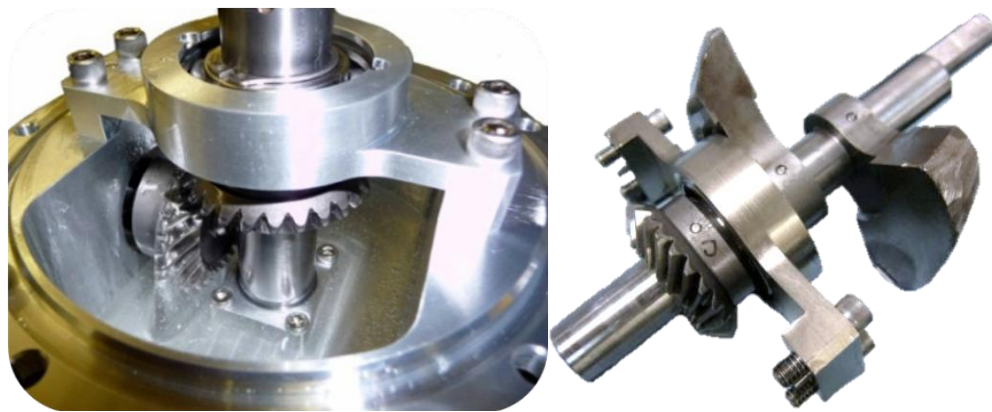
Expander lubrication system (left) and shaft assembly (right).
